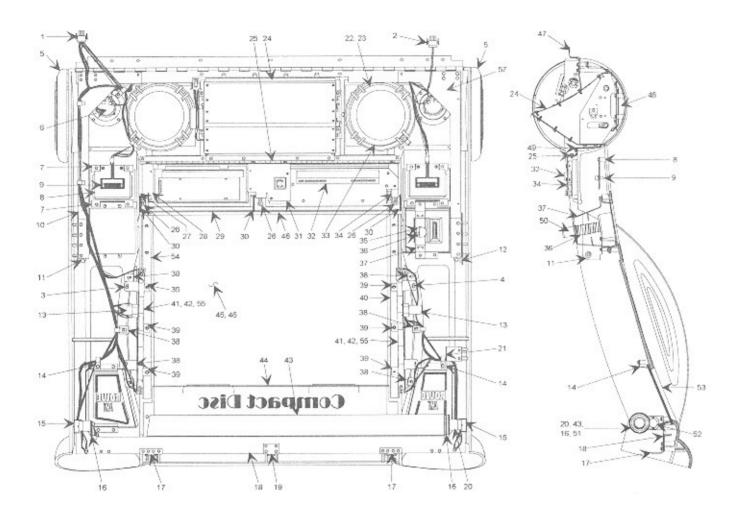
CD-100F Top Door Assembly (Sheet 2)
